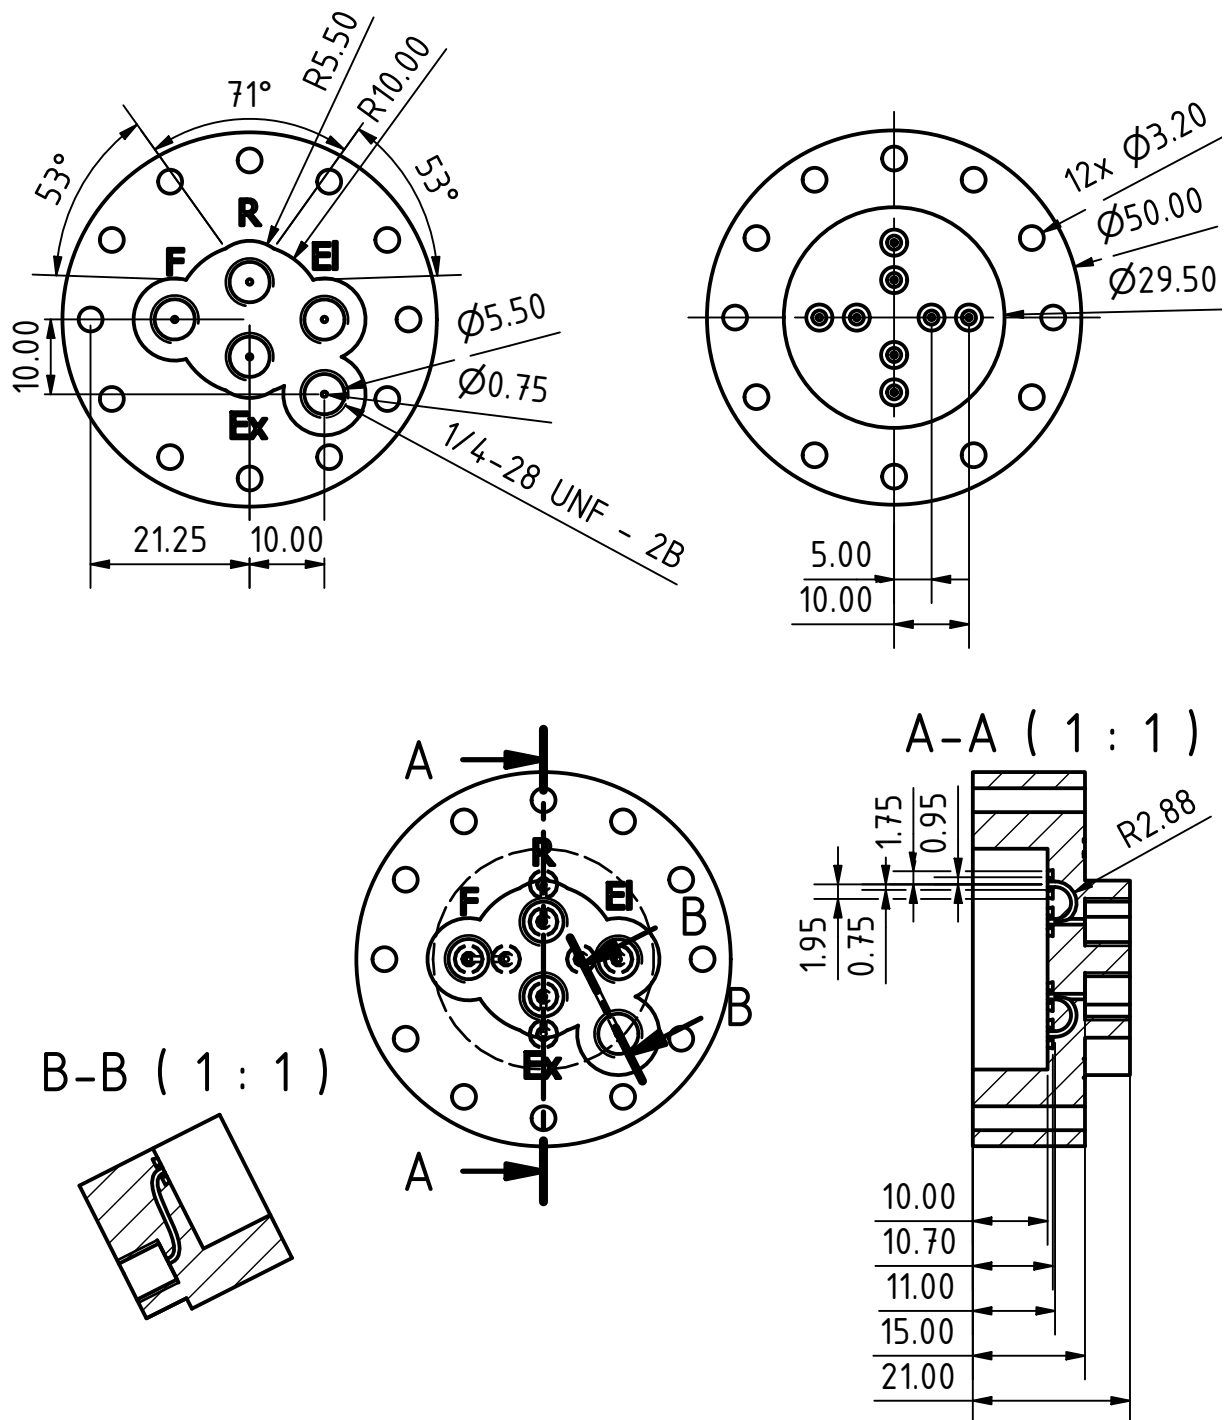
Technical drawing of the stator of the integrated SMB system: top view (top left), bottom view (top right), and section view (bottom) with scale 1:1. All threads were cut after printing, all dimensions in mm.
